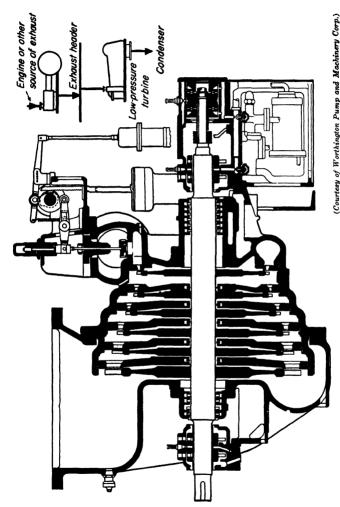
Low-pressure, or "subposed," condensing turbine. Because of the small pressure range over which they operate, they have comparatively few stages. The six-stage impulse machine above may be considered typical except for the upward exhaust, which is dictated by use of a barometric condenser or other special local conditions. The steam-admission valves are cam-lift actuated. Using excess exhaust steam in low-pressure condensing turbines often permits generating additional power without finel increase.
